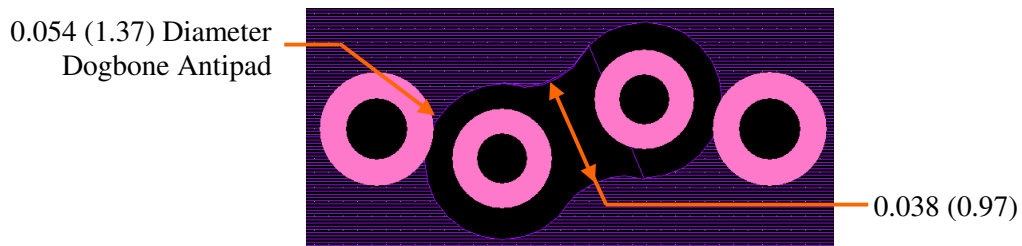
Antipad Clearance – Crossbow™ 2mm+ Backplane Connector
